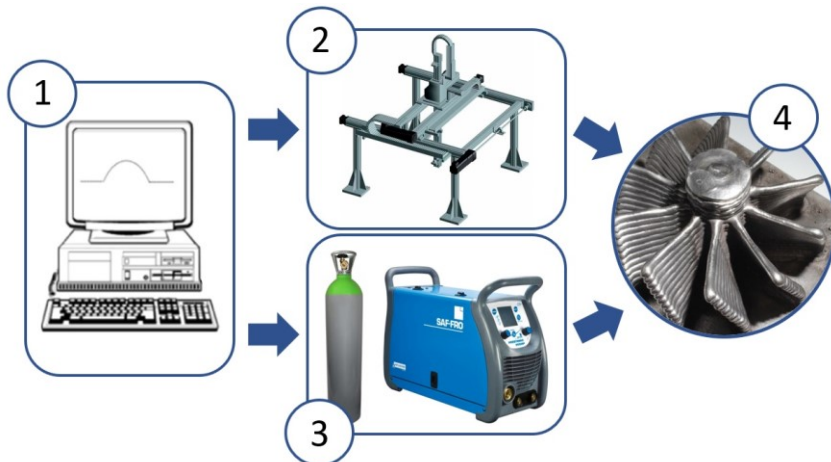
WAAM equipment; (1) Computer and Control Cabinet, (2) Positioning structure, (3) Welding unit (welding power source, wire feeder and shielding gas bottle), (4) Final Part
